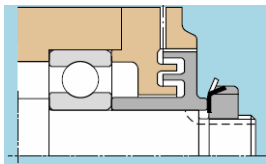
Axial labyrinth seal Figure 26 Secondary seals (Left: Nilos-ring, Right: O-ring)
